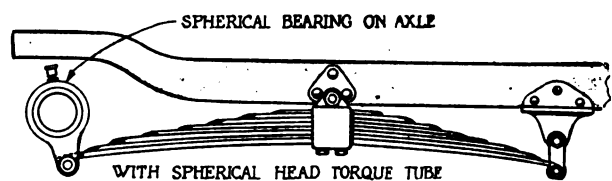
Ring bracket at rear end with spherical bearing on axle casing on the Charron.
